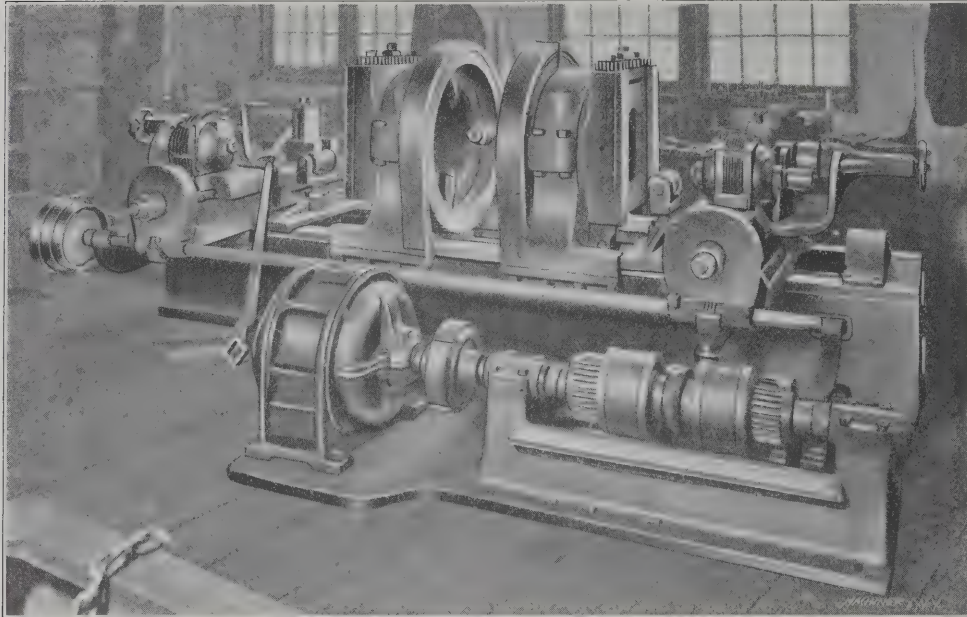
Rear View of Axle Lathe, showing Electrical Drive, Two-speed Clutch, etc.
